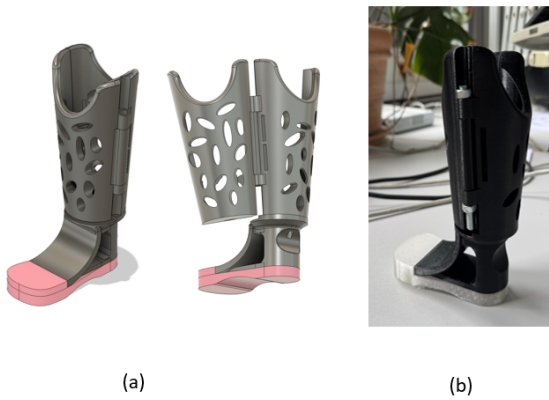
Adapted 3D-printed orthoprosthesis. (a) CAD Design, (b) 3D-Printed device, ready for testing with the child.
